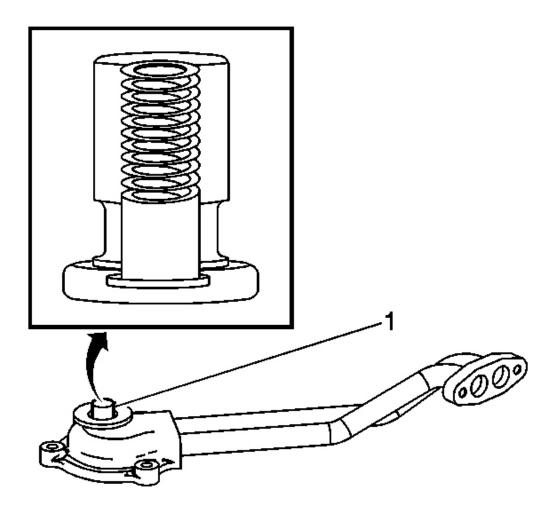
Oil Pressure Regulator Valve Courtesy of GENERAL MOTORS CORP.
